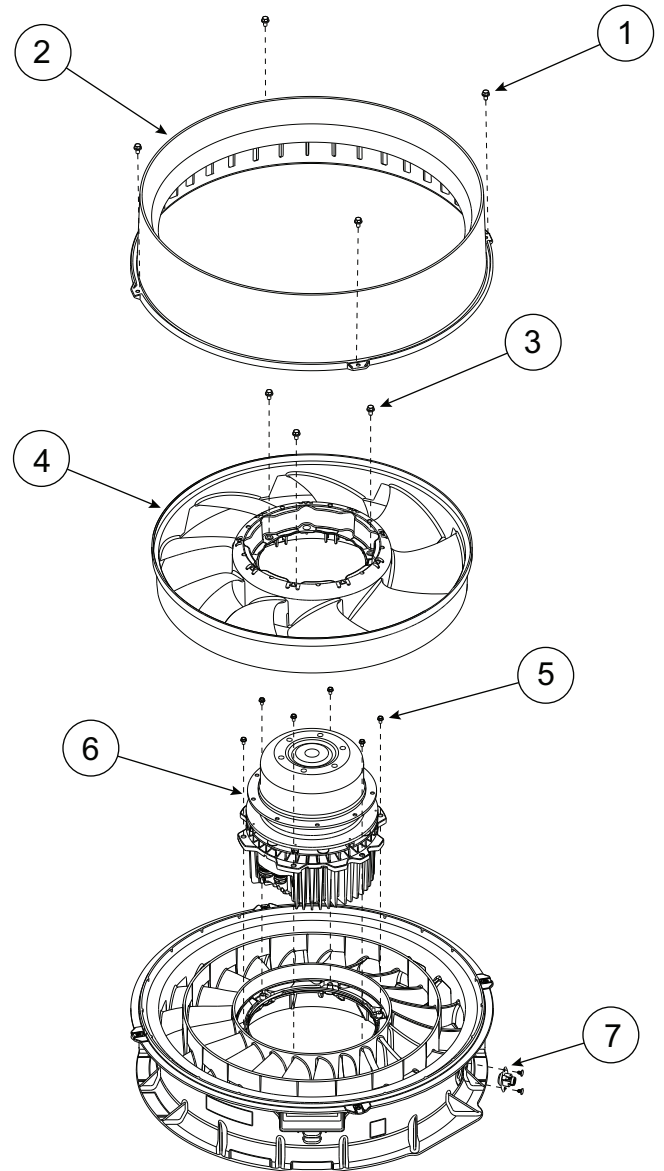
Disassembling Standard or Medium Static Motor and Fan Assembly
